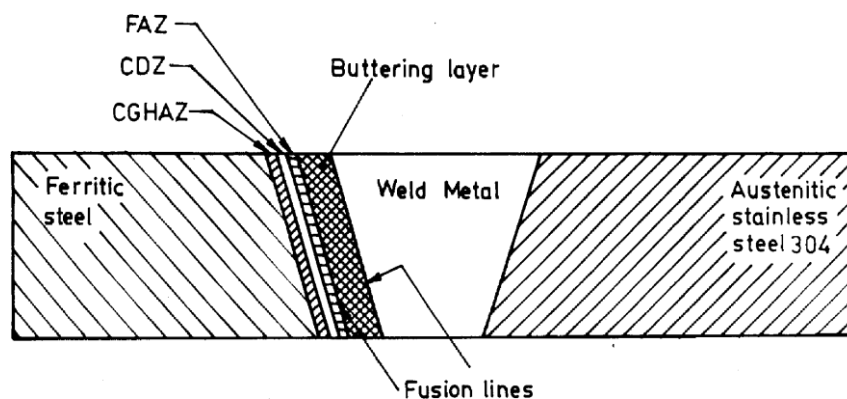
Bimetallic weld assembly (Chhibber et al., 2006 [27]).
